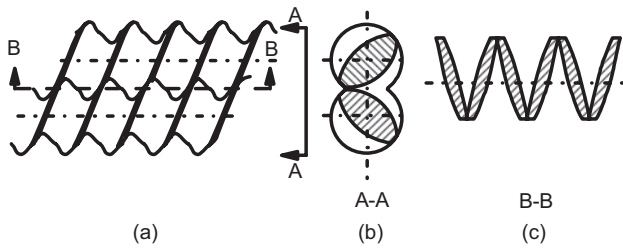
Self-wiping corotating twin-screw extruder. (a) Closely intermeshing double-flighted screw elements. (b) Section A–A showing the barrel and screw cross sections. (c) Section B–B showing the open region between the screw flights.
